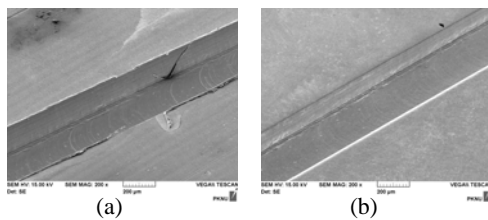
Micro channels machined by magnetic abrasive deburring process
